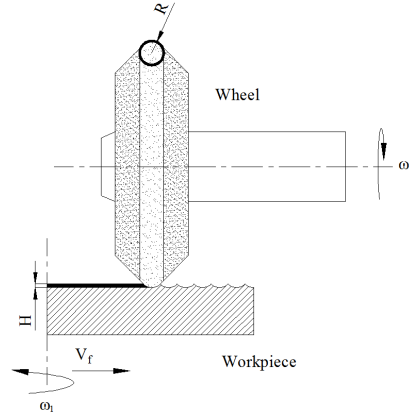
Ideal surface produced by an arc-shaped grinding wheel
